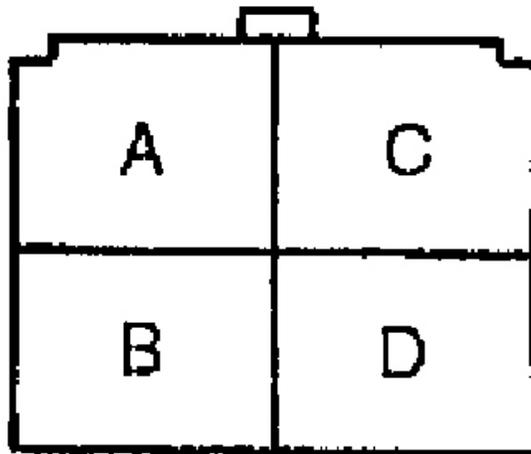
Inspecting Resistance Of EGR Valve Coils
